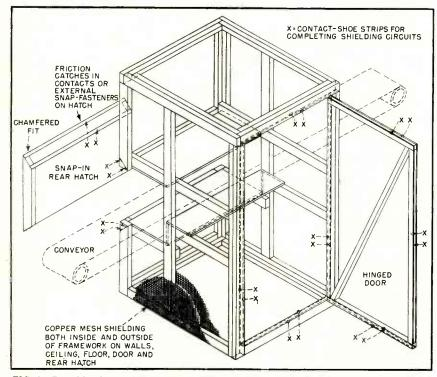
Portable shielded test-booth for chassis conveyor. It can be moved to any production line in a few minutes with a hand-lift truck
